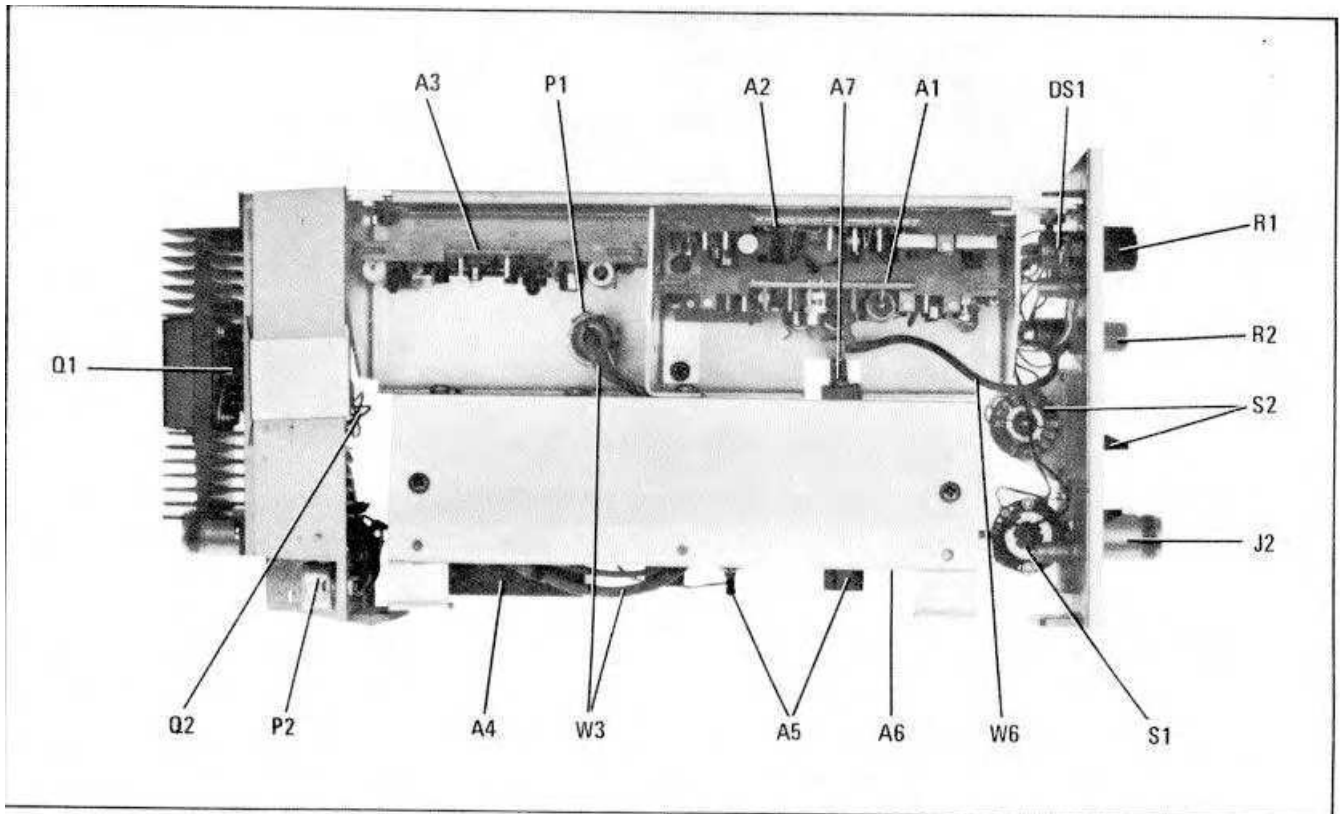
Location of Major Assemblies, Top View (Option 001)
